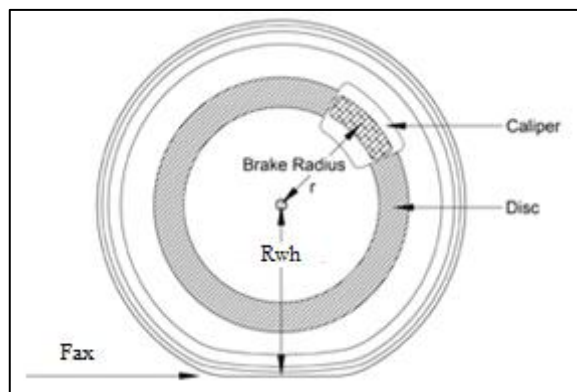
Rolling tyre dimension. Adapted from [24]
